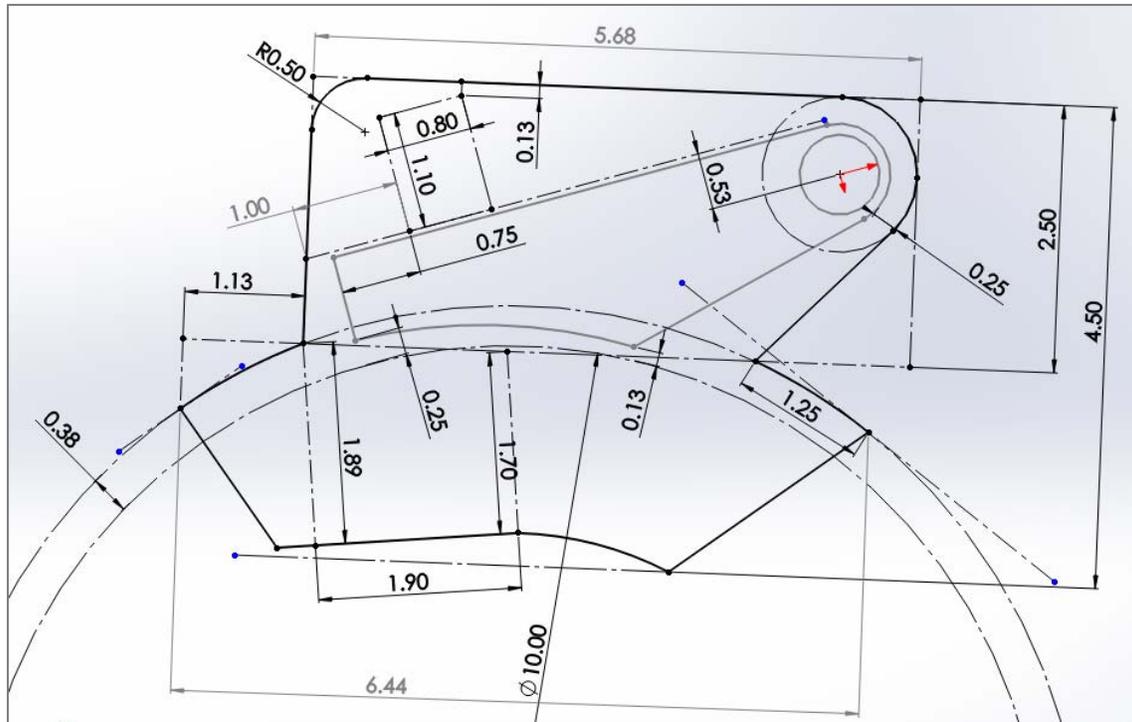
The dimensions used to model the front outside housing part in Solidworks. For the back outside housing part, the dimensions remain the same except for the dimensions inside the blade radius. These dimensions are dependent on the maximum area allowed to weld the housing to the blade cover.
